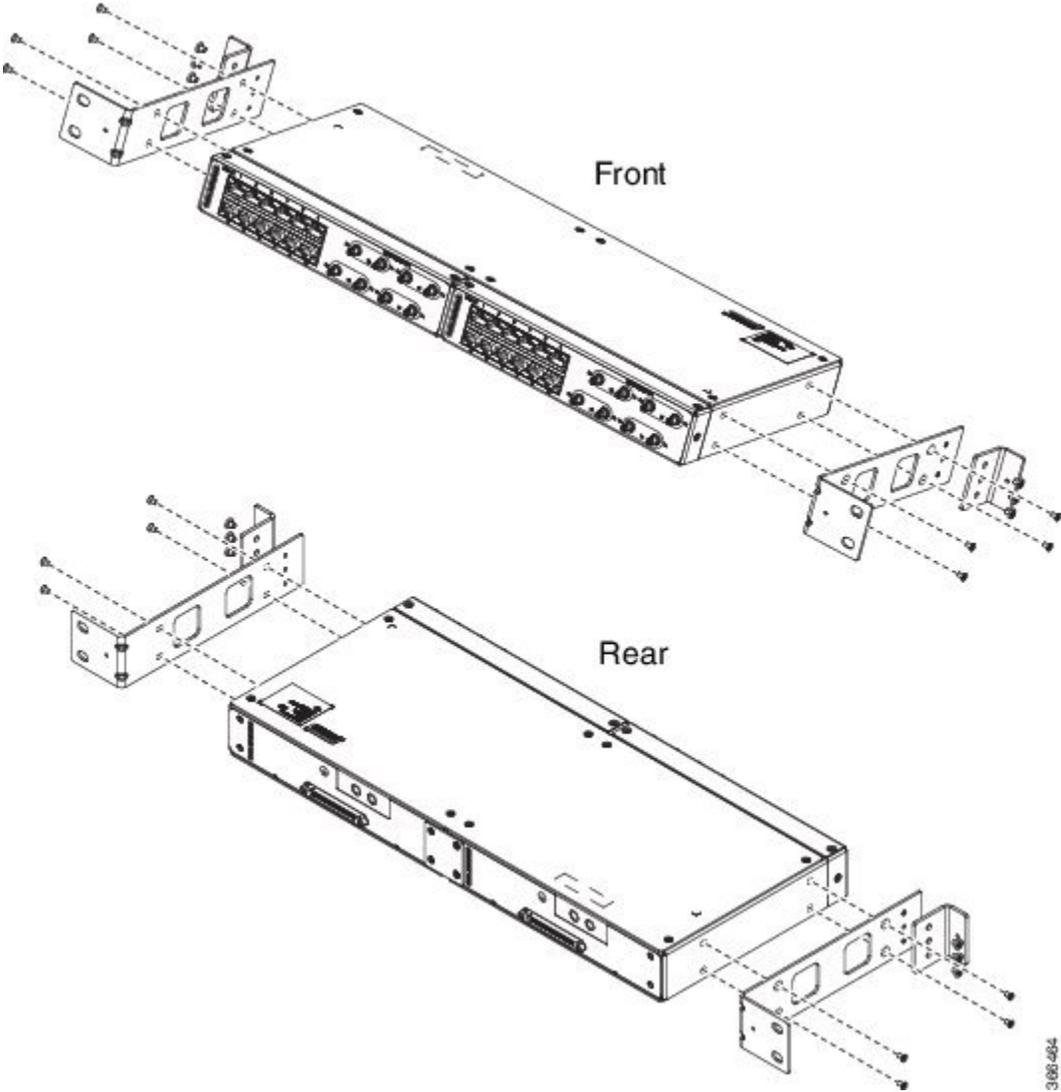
Installing the Patch Panel - Single in a 23-inch Rack
